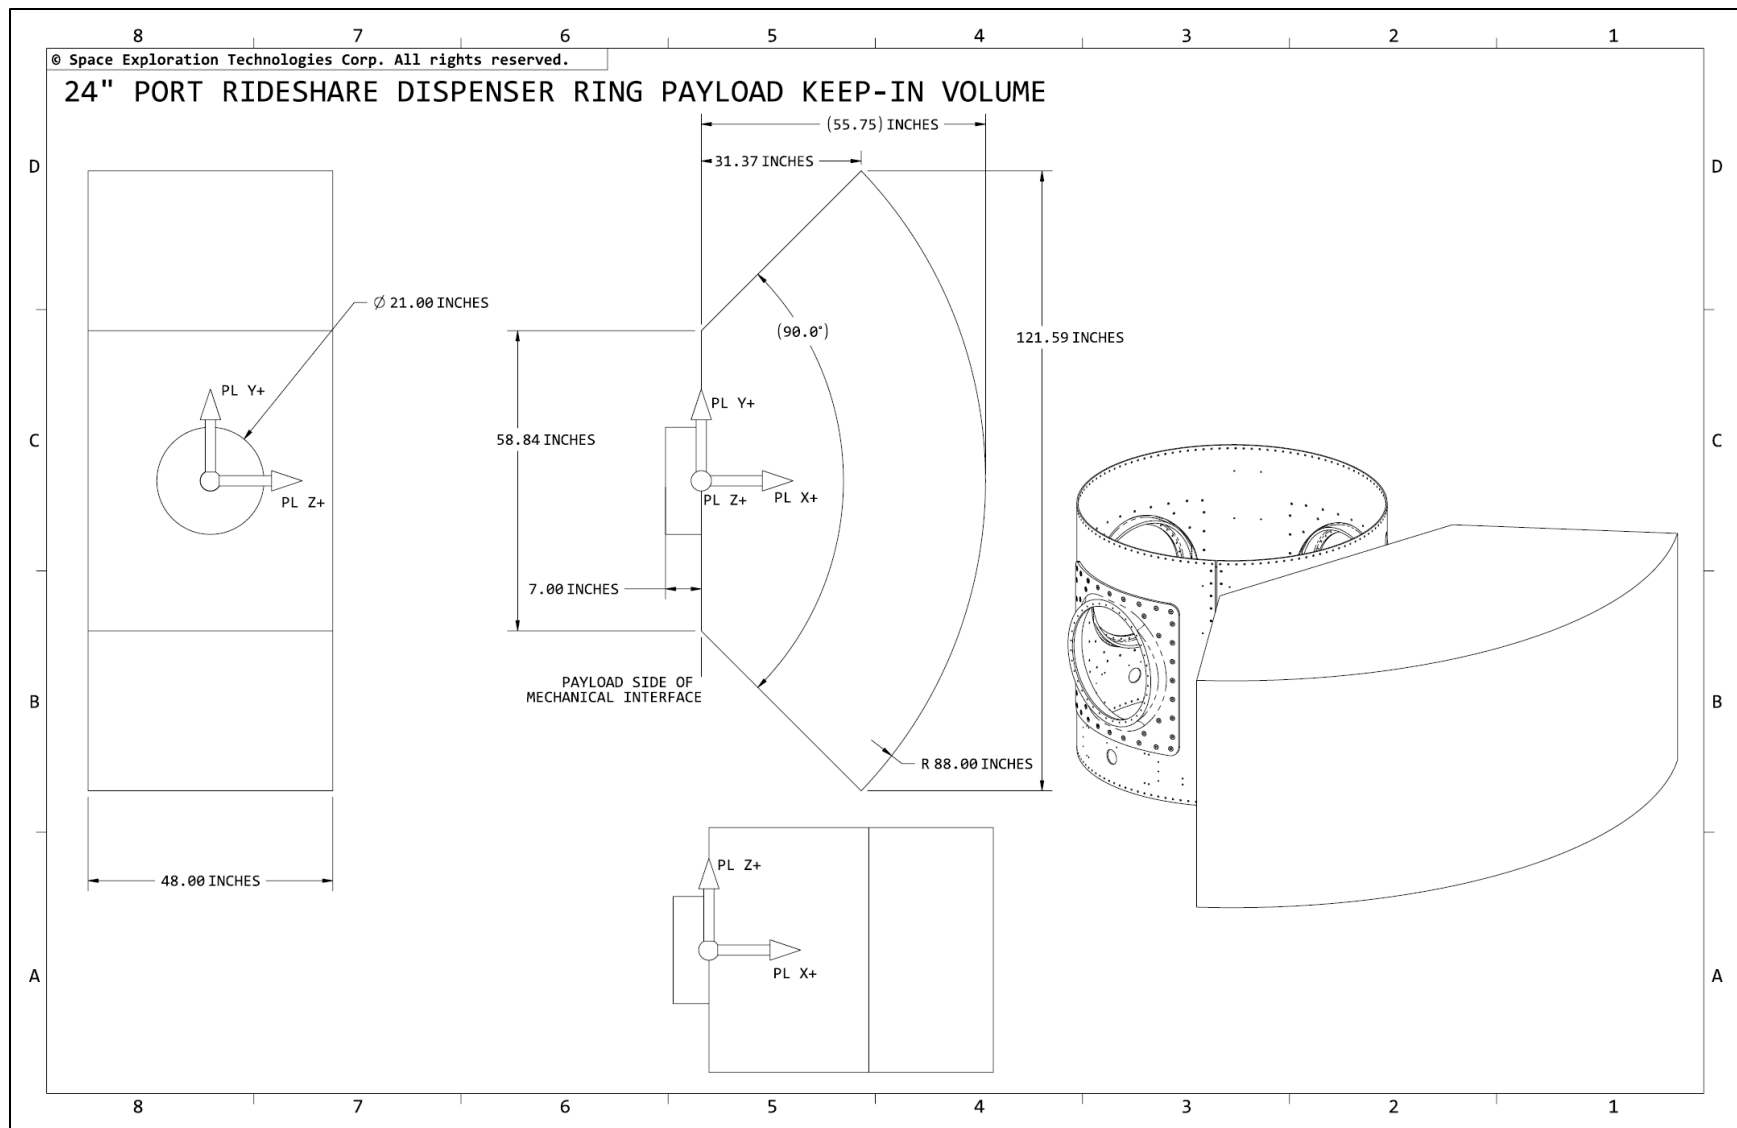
Rideshare Dispenser Ring 24" Diameter Mechanical Interface Volume Drawing
